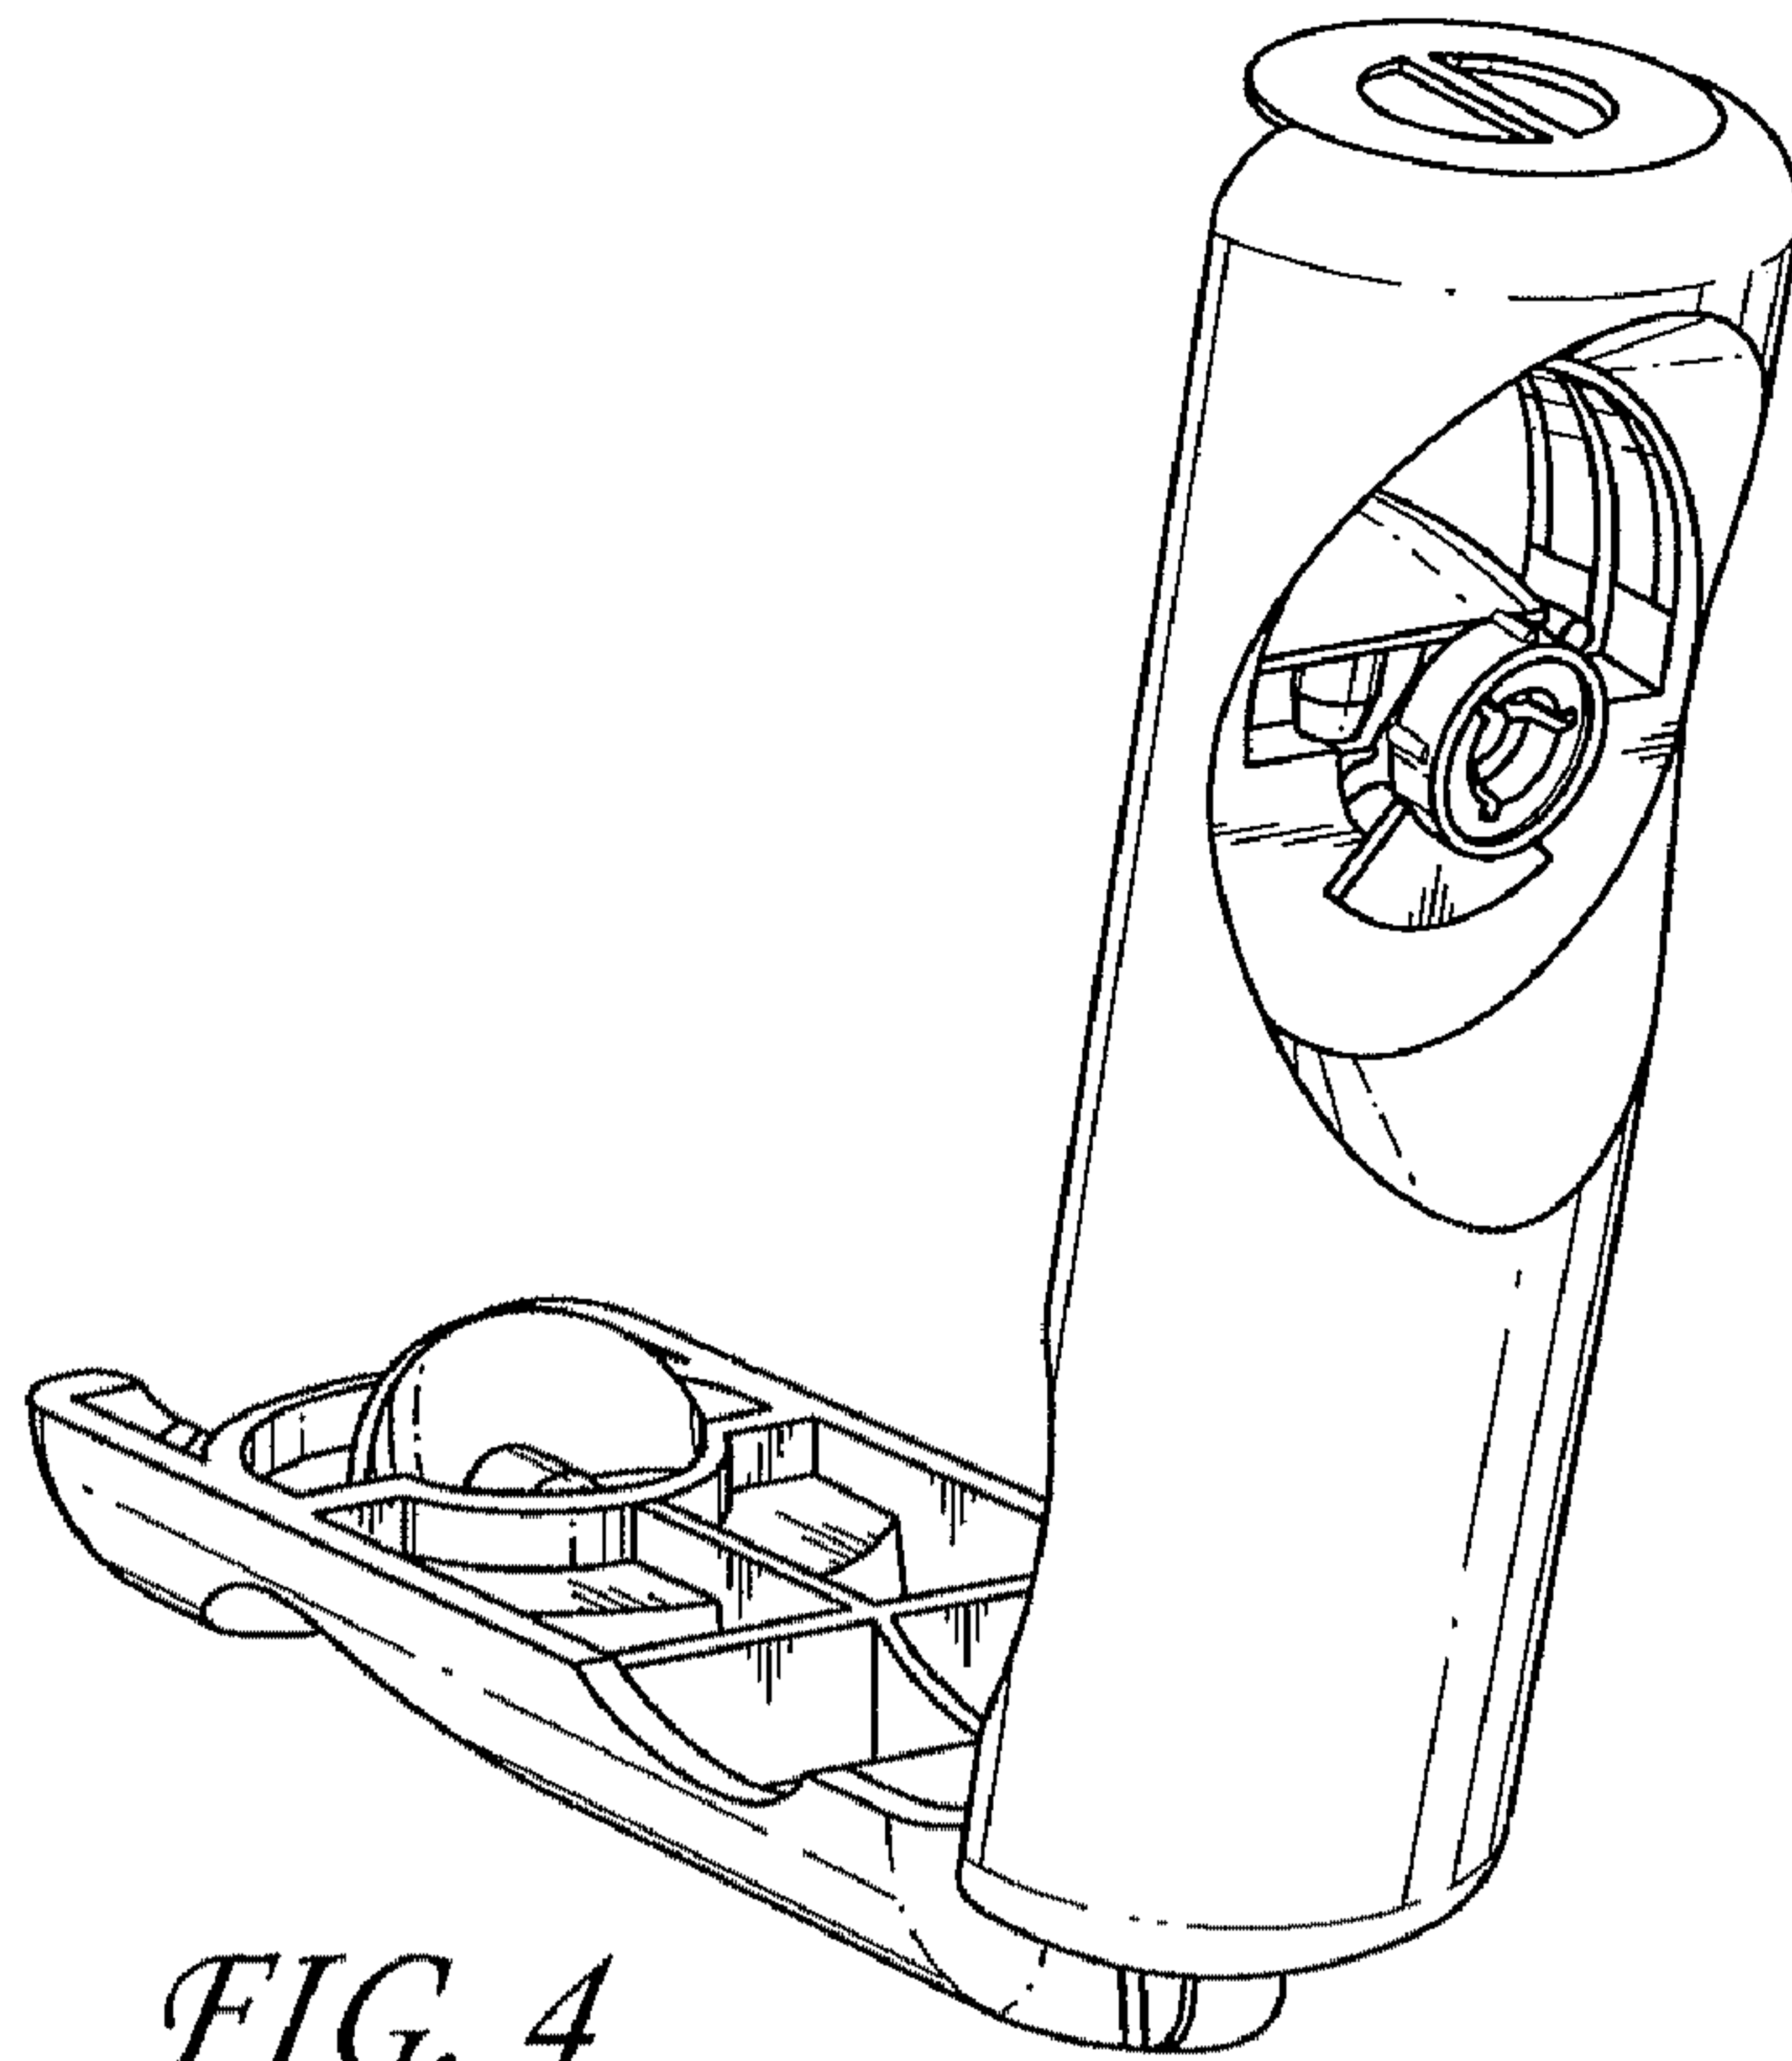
is a top rear perspective view in an open position of the hole punching tool of FIG. 1; and,
